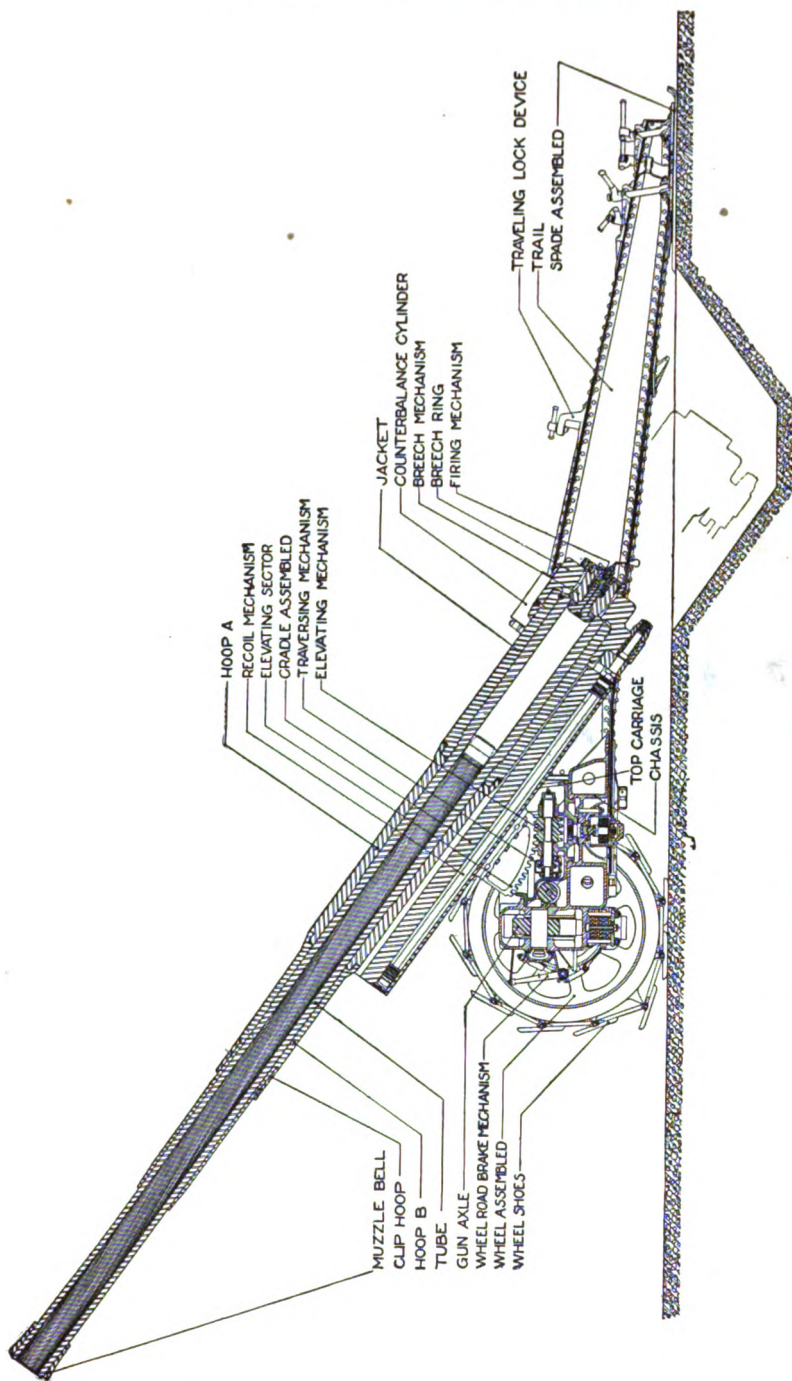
155-mm. gun carriage—longitudinal section in battery
